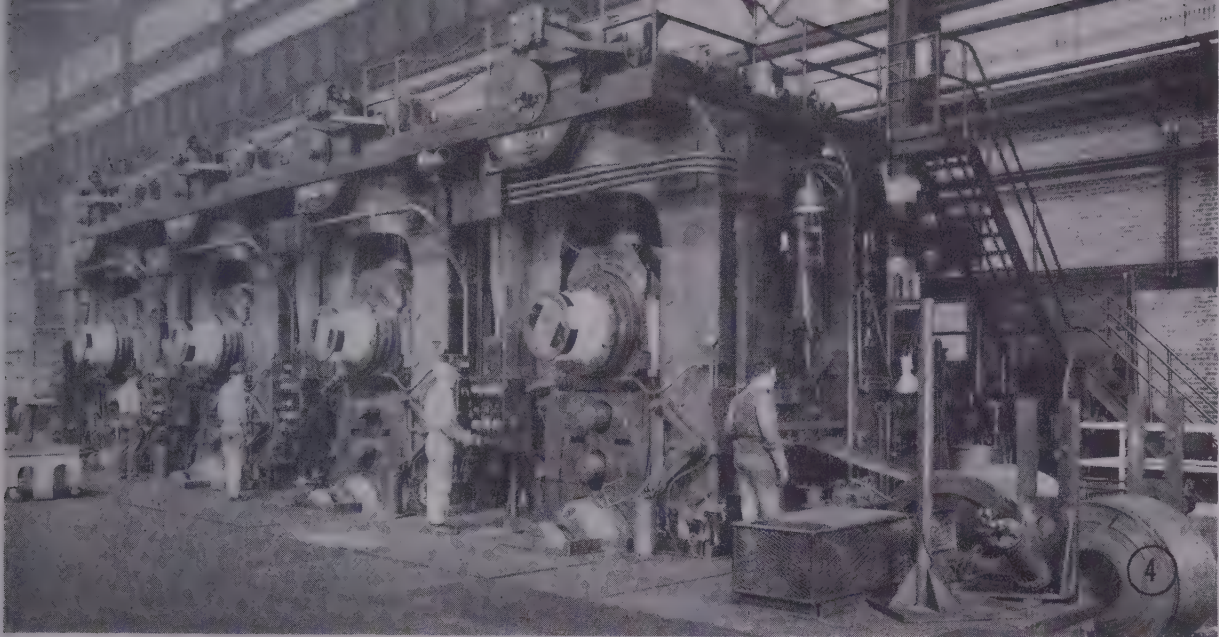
Entry end of new 56-inch tandem cold reduction mill
